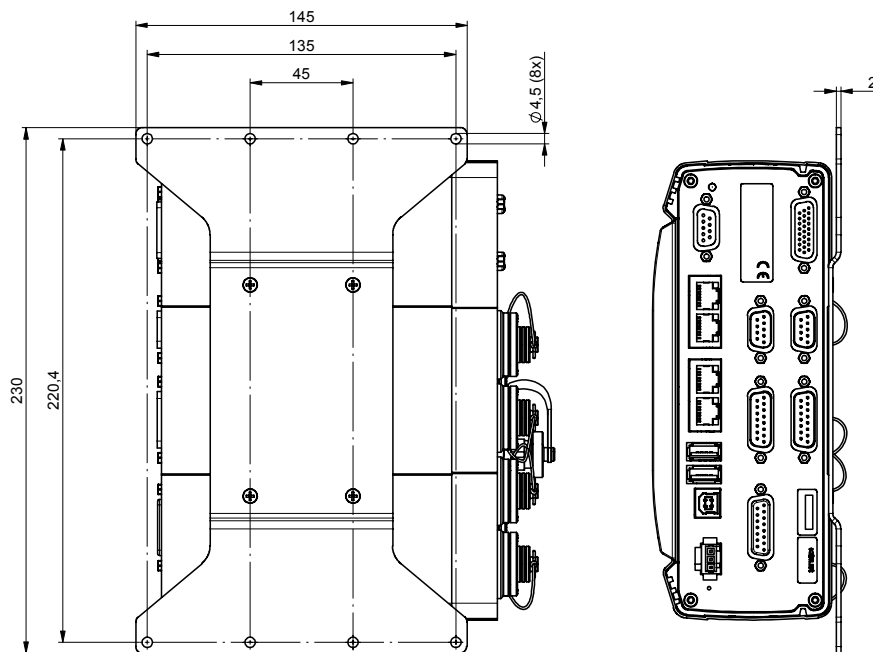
Dimensions ComoNeo mounting plate 7.511.368
